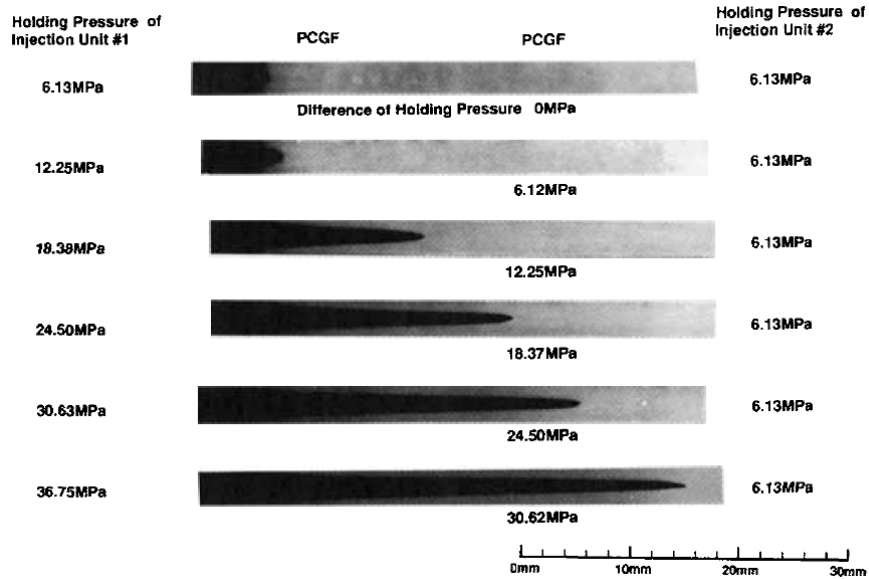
Weld line geometries of PCGF/PCGF
